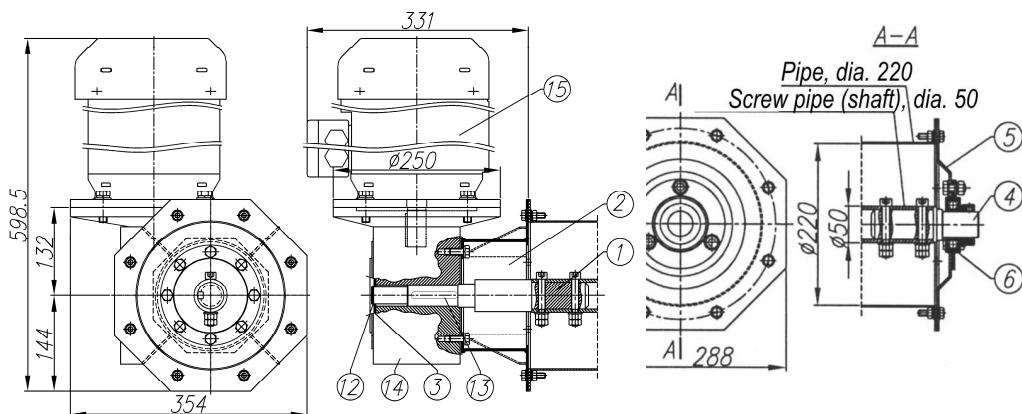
PS220-N6/300- screw conveyor ➤ Ø220 - drive power P=6kW, n=300 rpm
